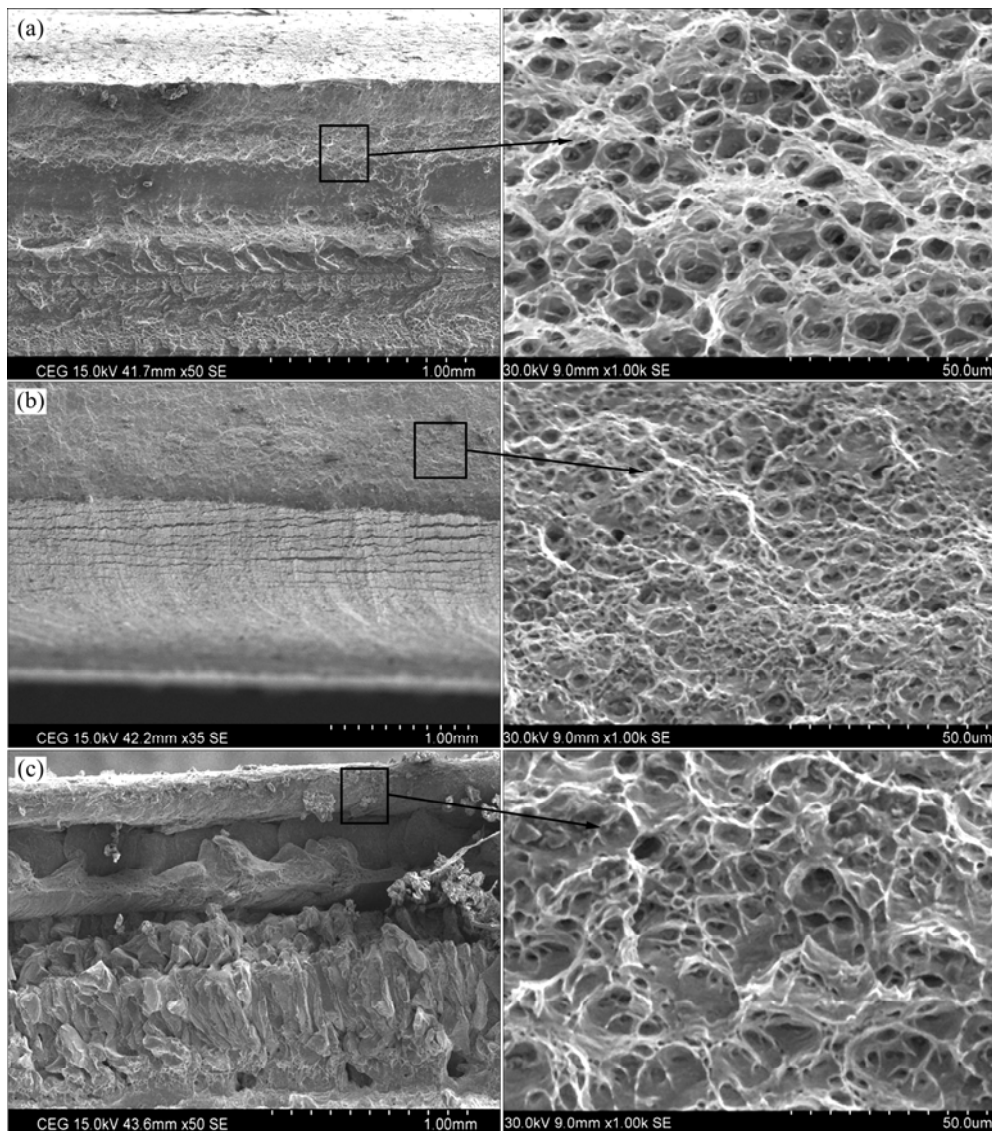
Fractographs of smooth tensile specimens: (a) S66; (b) S55; (c) D65
